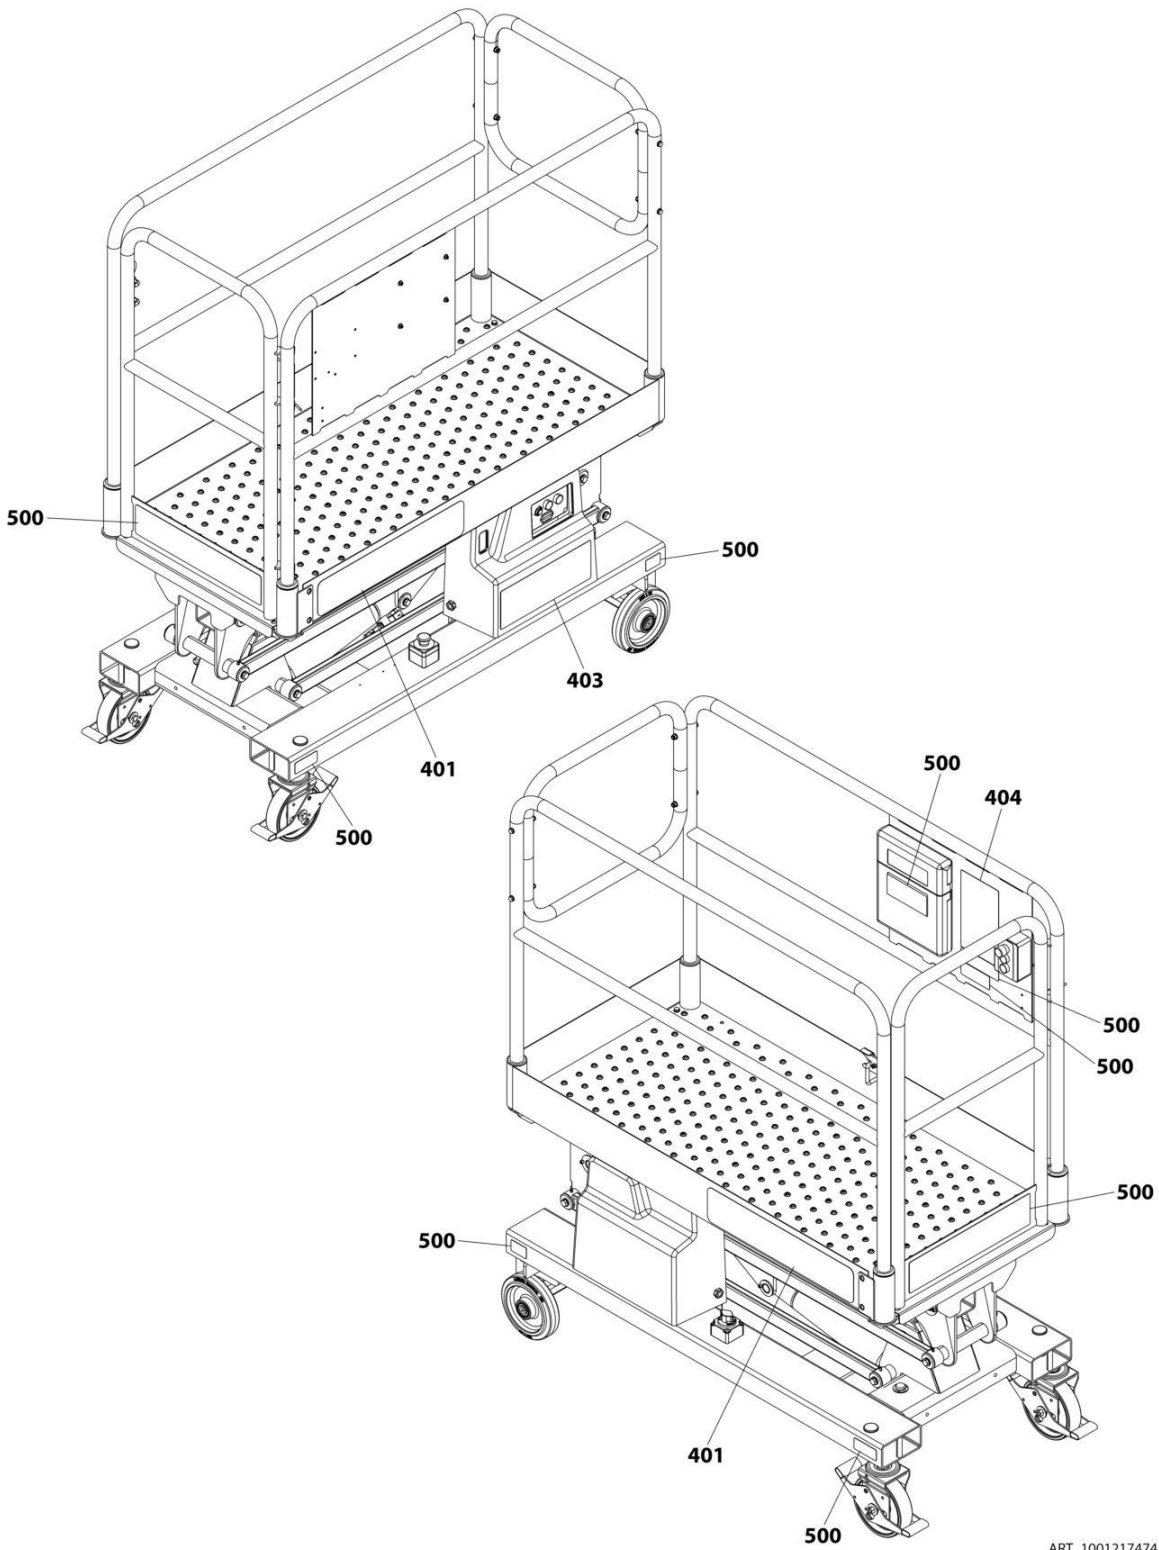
CYLINDER ASSEMBLY - LIFT
